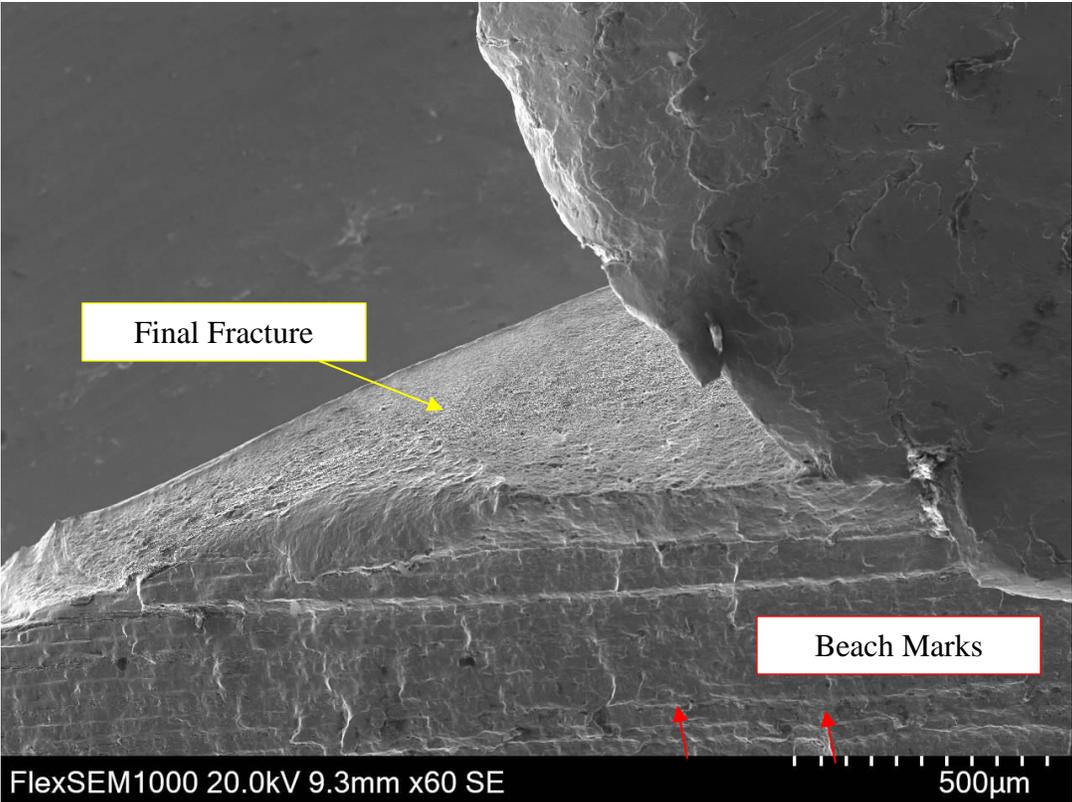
TOP END OF THE FRACTURE SURFACE (SEE FIGURE 19), BOLT C2
